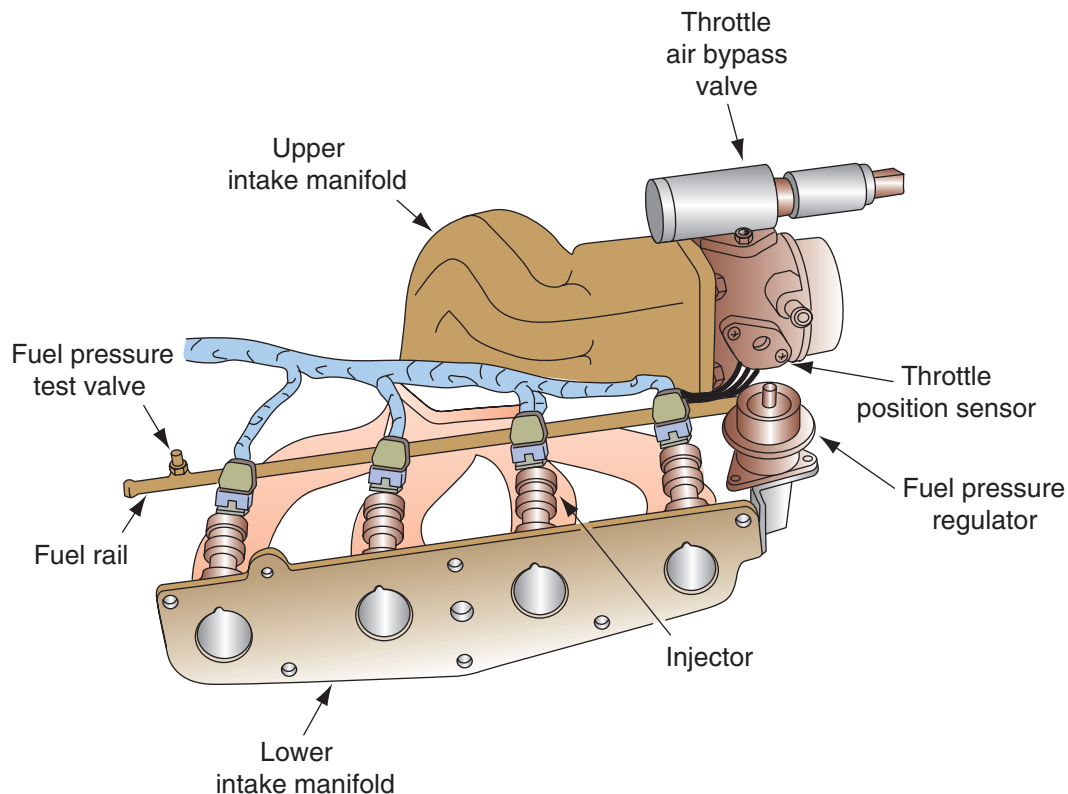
A late-model intake manifold for a four-cylinder engine.
